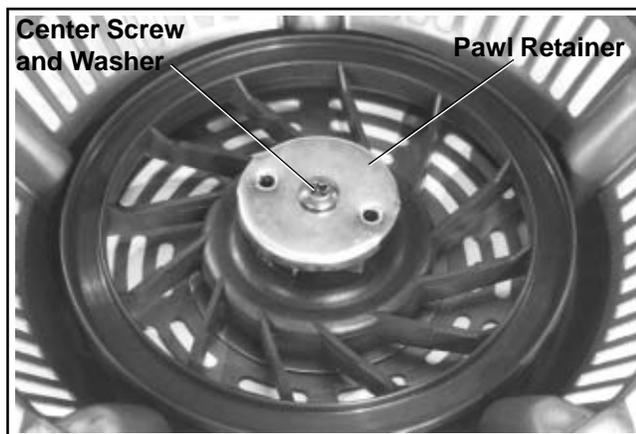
Center Screw, Washer and Pawl Retainer.
